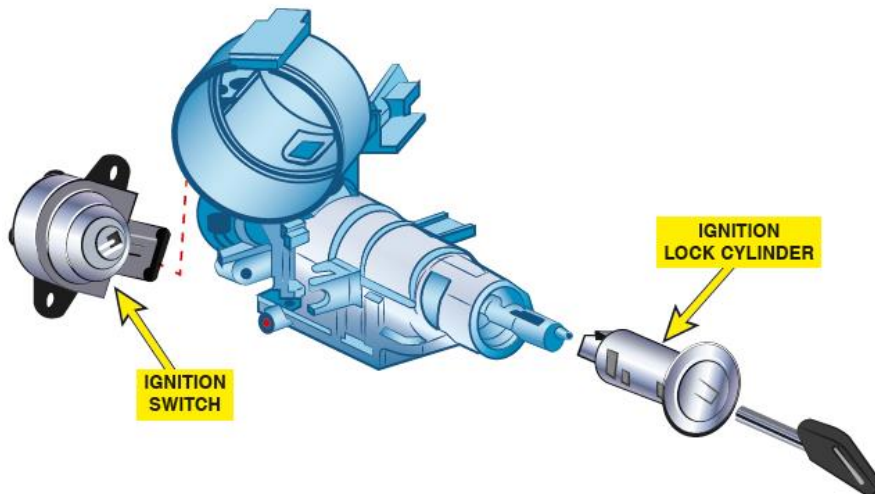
The ignition switch is mounted to the lock cylinder and is a separate part.
